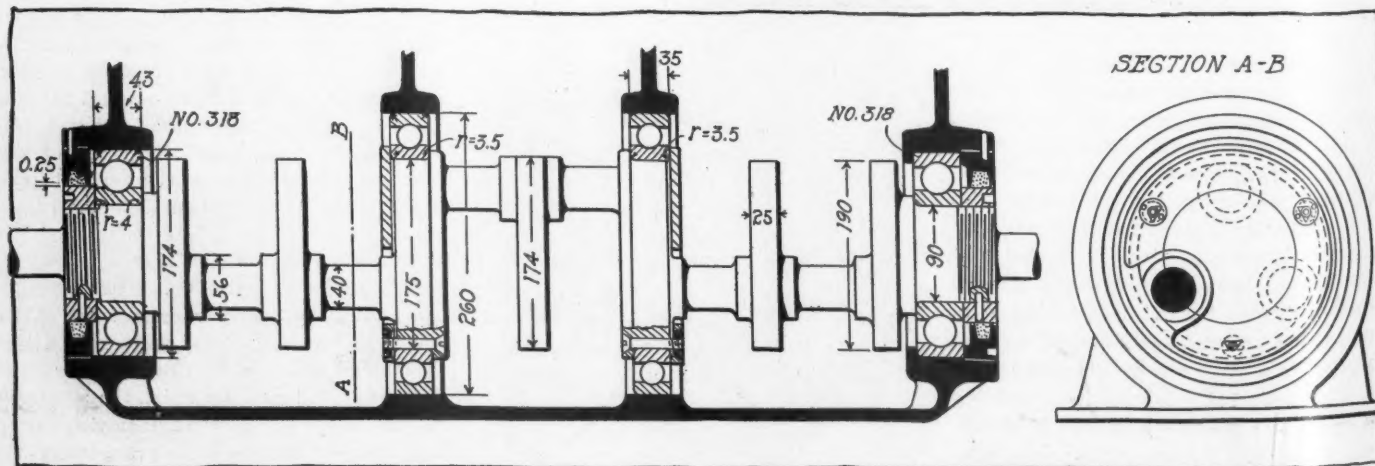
F & S BALL-BEARING DISK-TYPE CRANKSHAFT FOR SIX CYLINDERS
